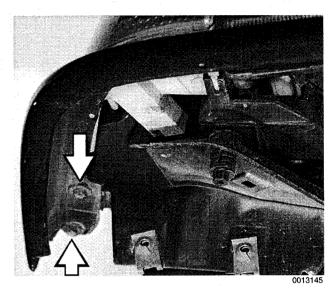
Front grille panel to front fender retaining bolts (arrows). Front bumper shown removed.
